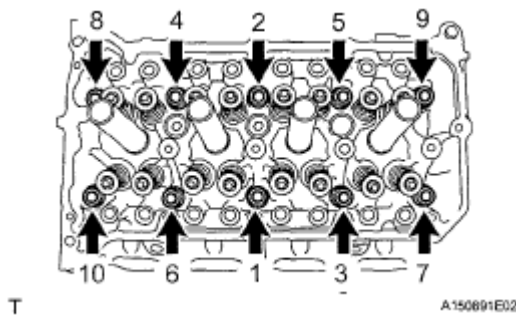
Identifying Cylinder Head Bolt Tighten Sequence
